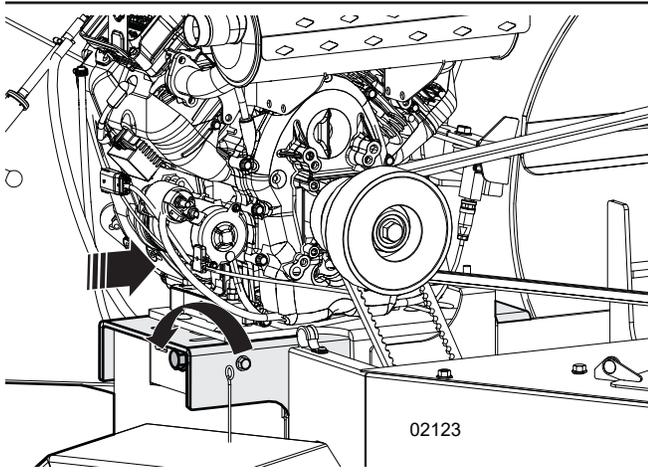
Rotor drive-belt tensioning bolt - counterclockwise
